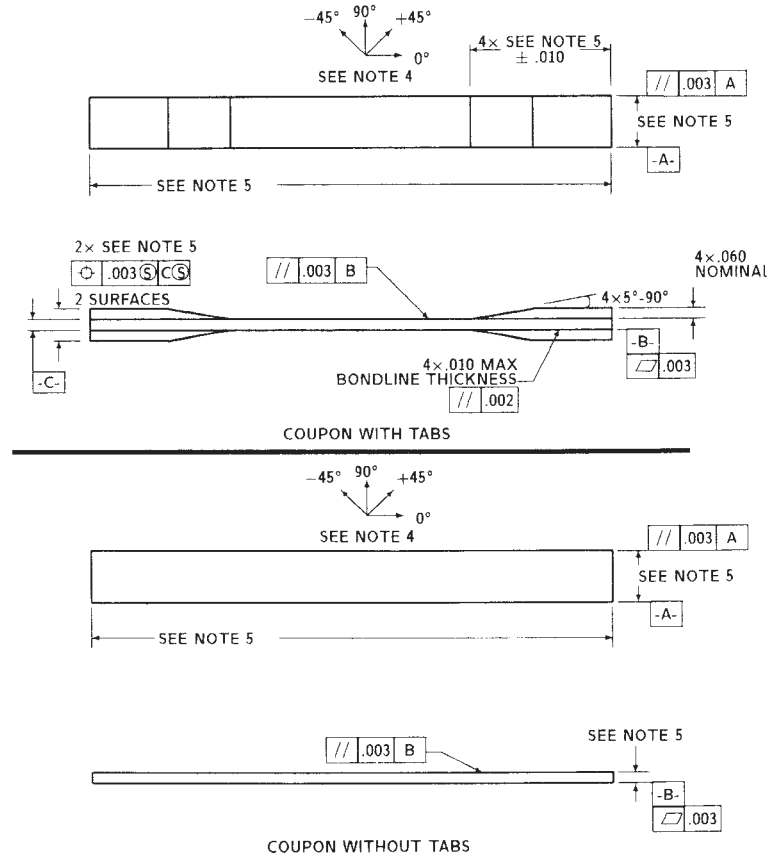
Tension Test Specimen Drawing (inch-pound)
